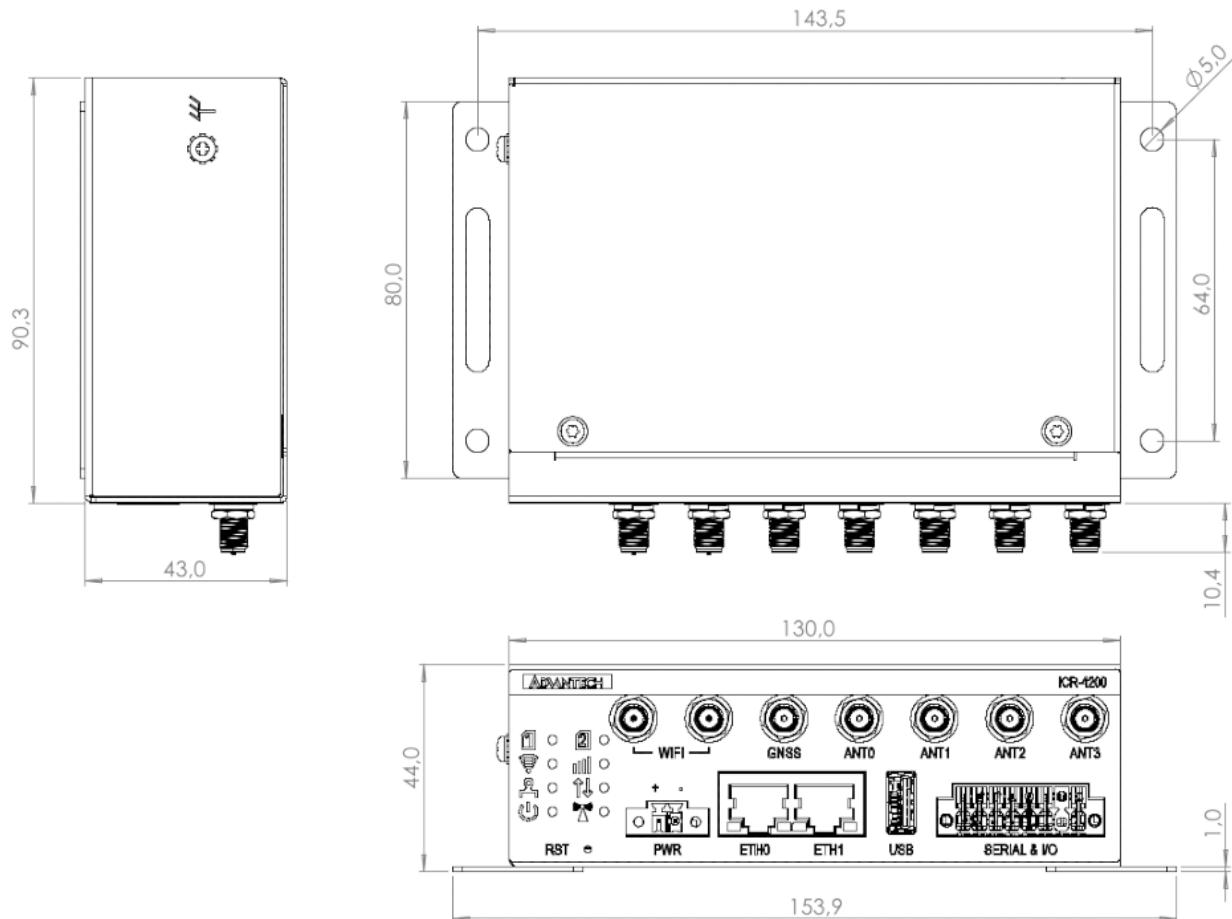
Router dimensions – front, top and right view with wall-mounting holder
